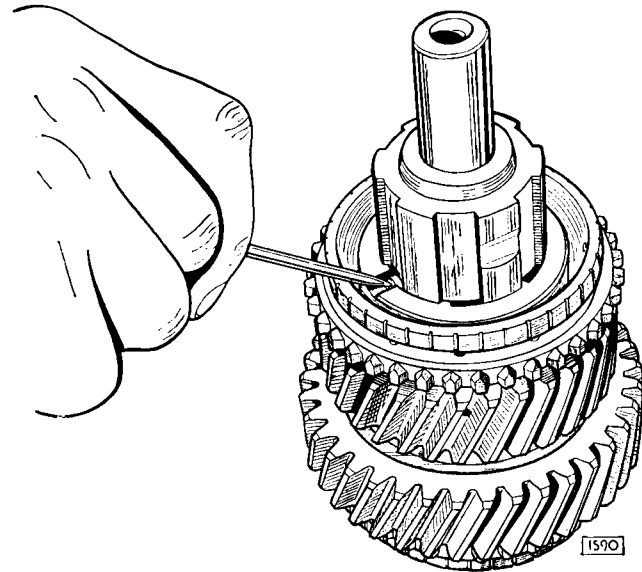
Depressing the 3rd speed thrust washer locking plunger
